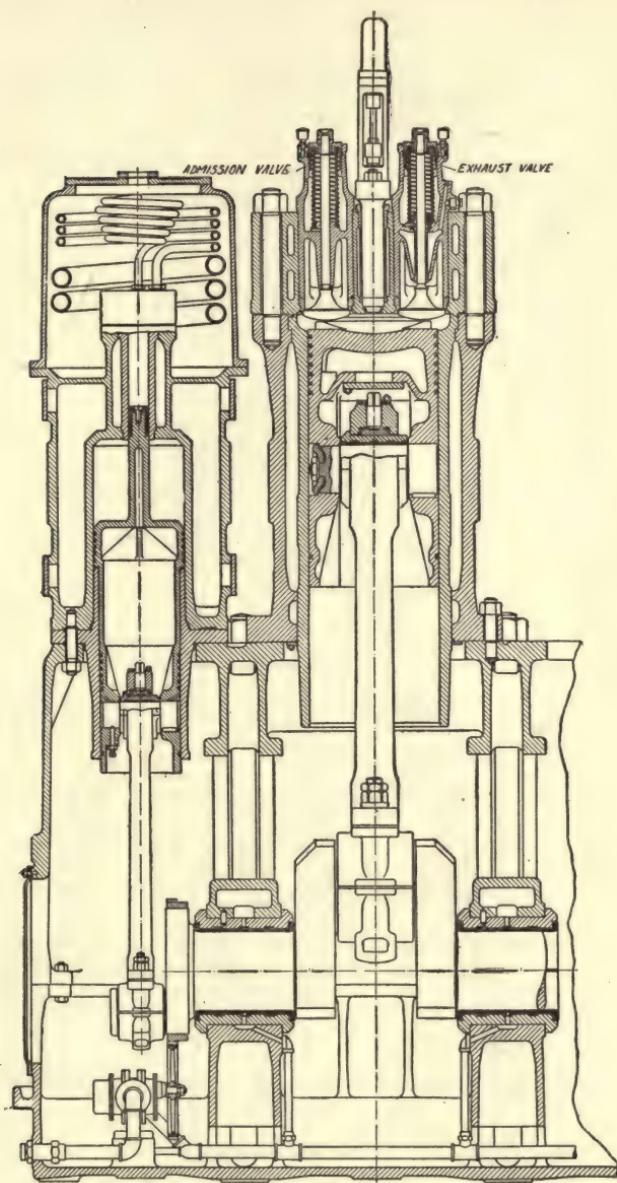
Busch-Sulzer Bros. Diesel engine.
